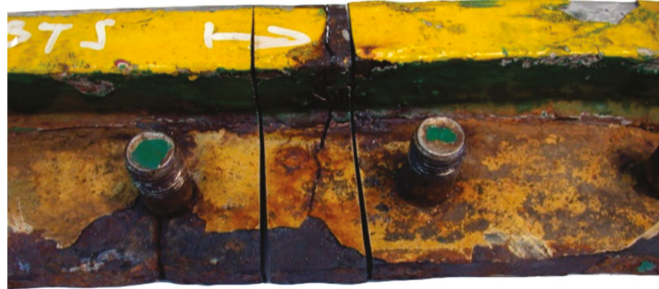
Crack II running through a bolt hole (handy-size bulk carrier 30185 DWT). Macroscopic examination.
